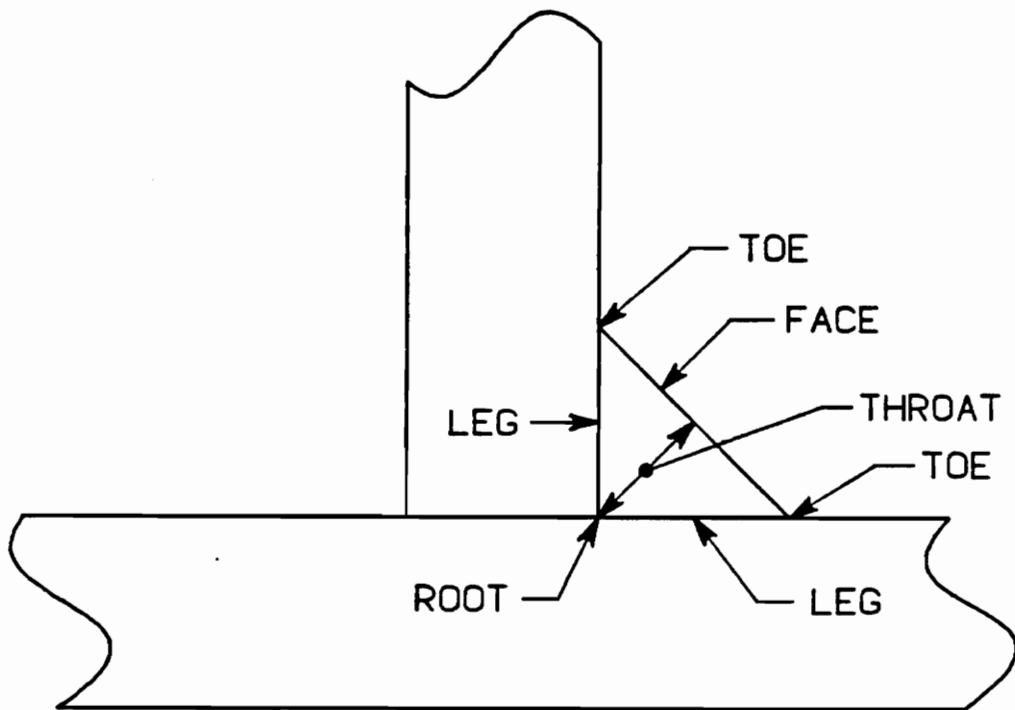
Basic Parameters of a Fillet Weld.
